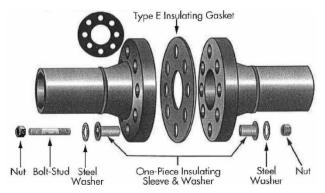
Insulating Gasket Assembly for Corrosive Service
